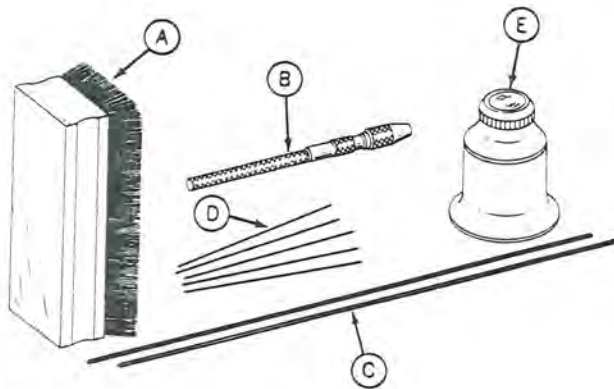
Tools for Reconditioning Nozzle Seat and Threads In Cylinder Head
